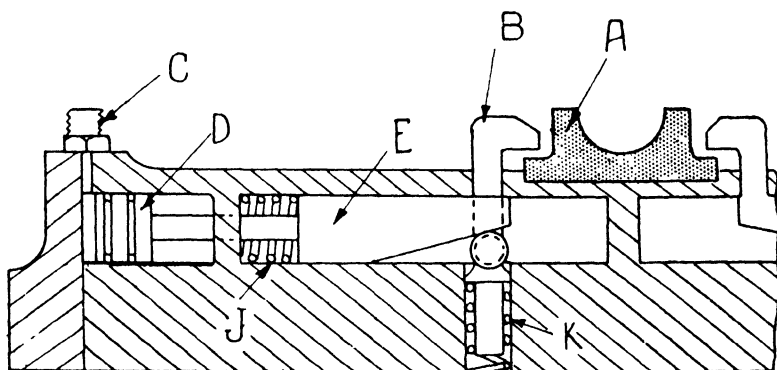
AIR CYLINDER AND CLAMP ARRANGED IN A FIXTURE.
